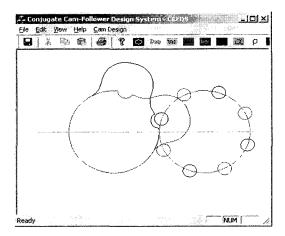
The Designed CCT Shapes for the Roller Gear Plate Cam Mechanism
